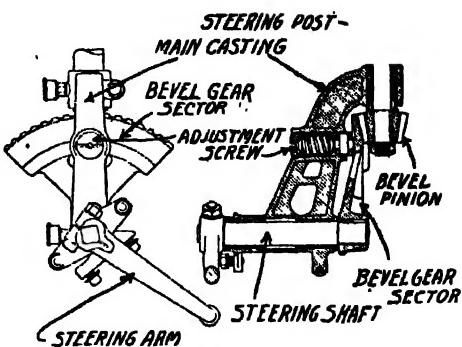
The Reo Bevel Pinion and Sector Steering Gear.
